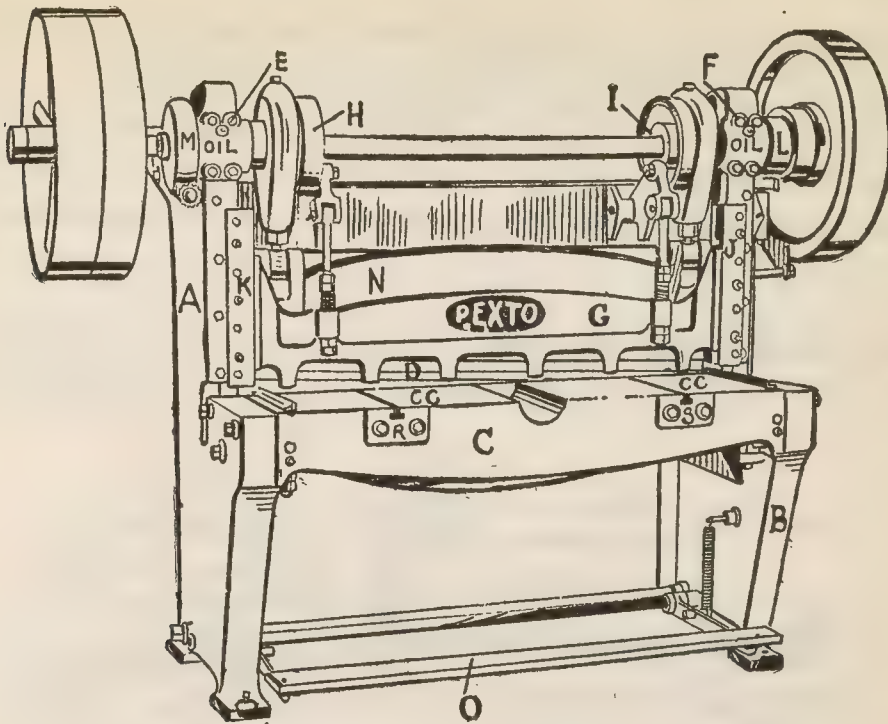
,765.—Pexto power squaring shears with overhead drive and gap in housing for permitting the trimming of sheets before squaring. *In construction*, the bed C, is accurately planed and bolted to the housings A and B, and it can be shifted towards or away from the upper cutting blade D. Graduations in fractions of an inch are cut in the bed along gauge slots CC. Gauge extension arms are fastened to the bed C, at R and S, and are held with two bolts for each arm.
